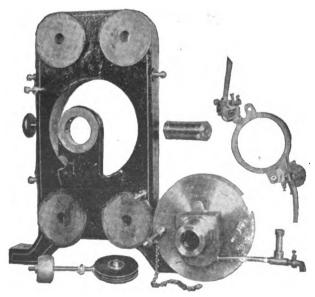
PARTS OF REGULATOR, READY FOR ASSEMBLING.
